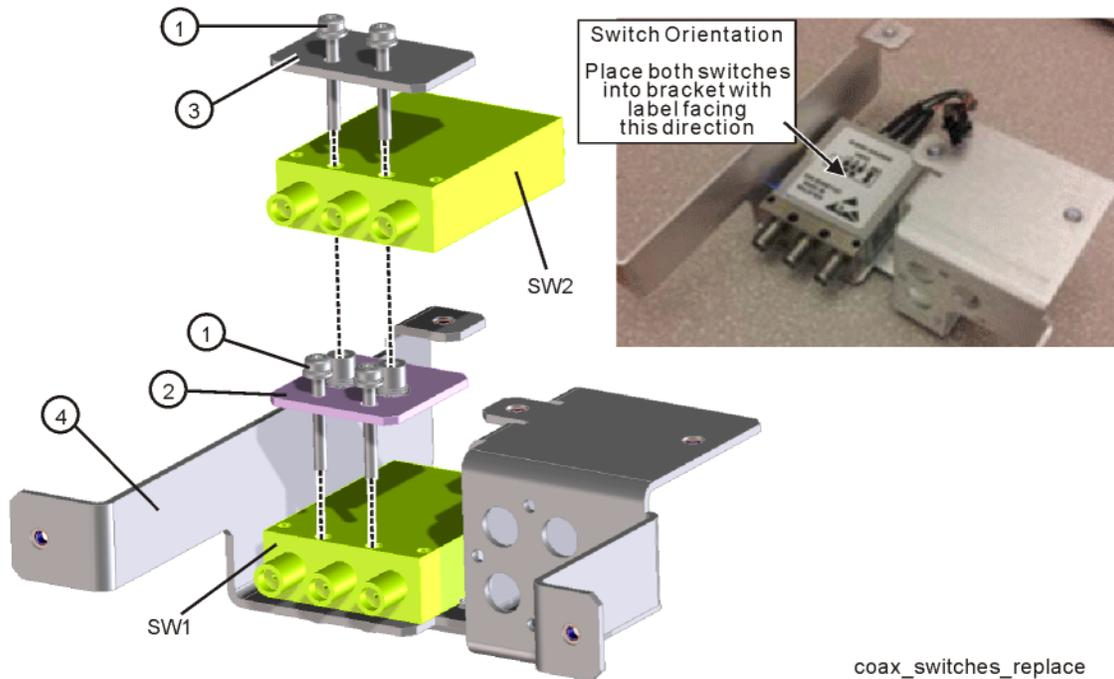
Removing Coax Switches from Bracket - Options 508, 513, 526
